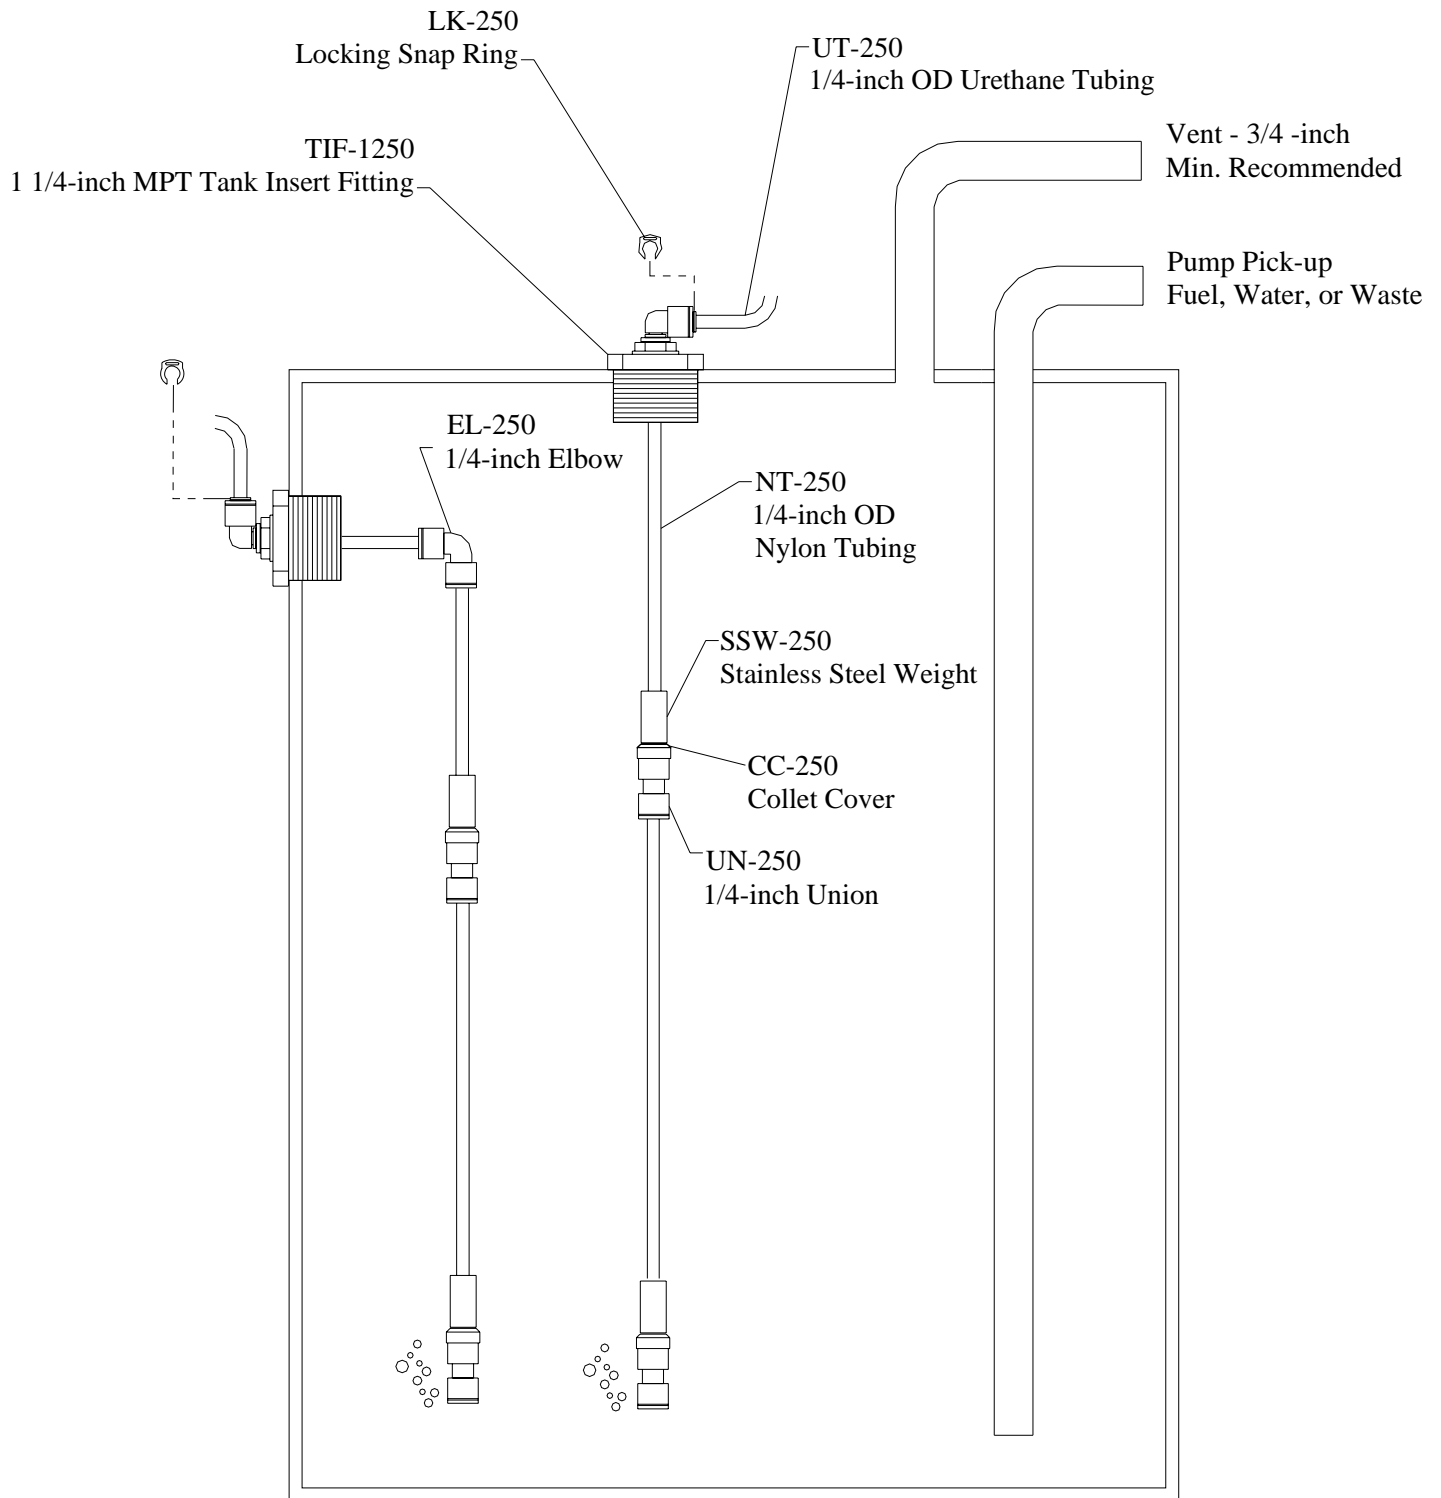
DEEP TANK AND SIDE TANK INSTALLATION
